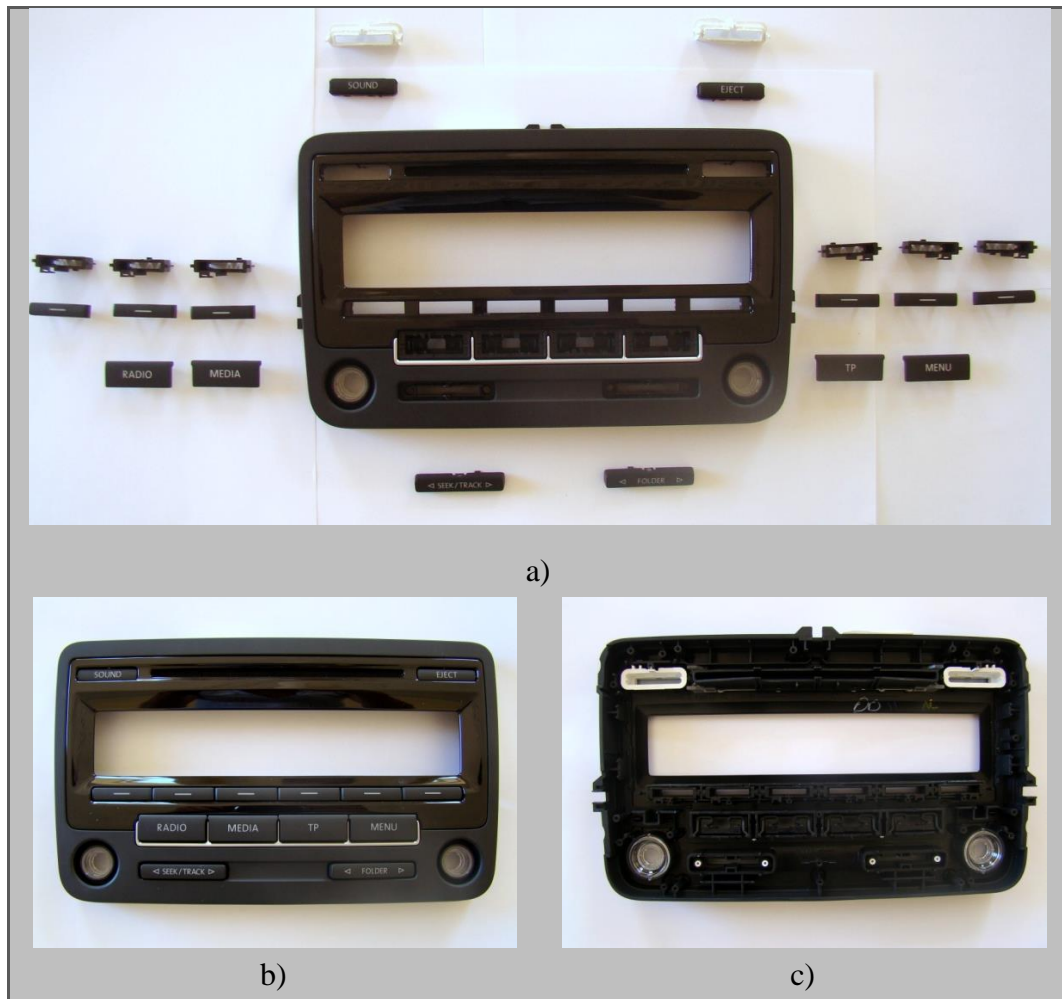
Radio bezel assembled in the assembly line a) different components to be assembled b) product assembled - front c) product assembled - back
